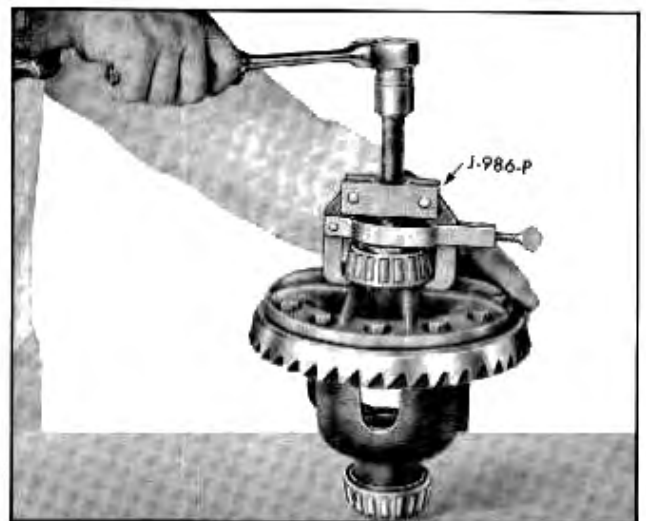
Removing Side Bearing With Puller J-986-P
